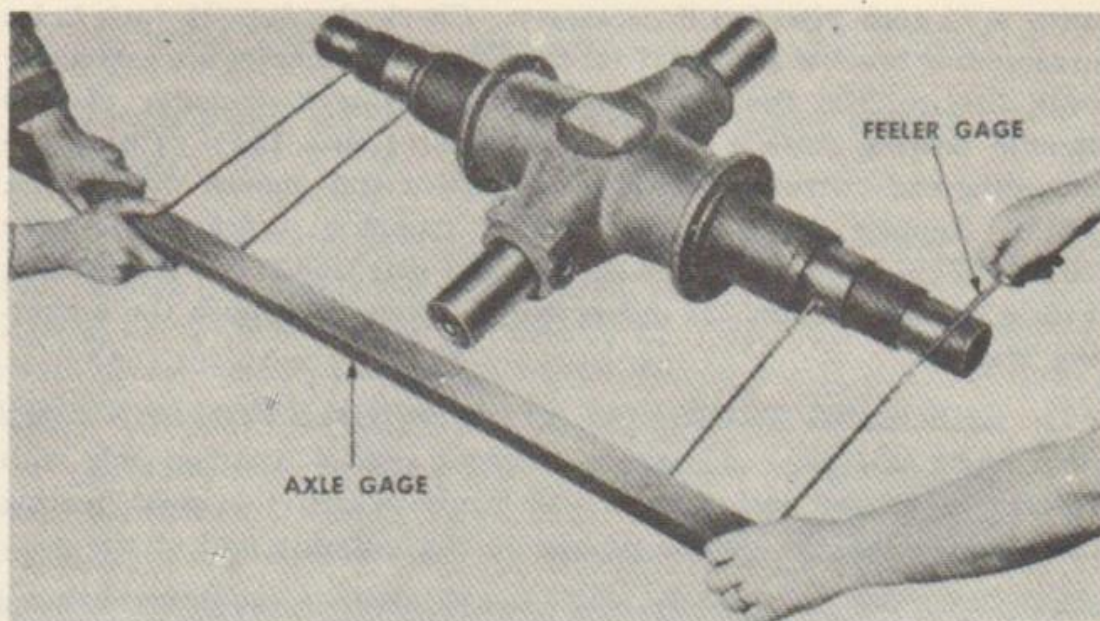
CHECKING TRUNNION AXLE FOR BEND
